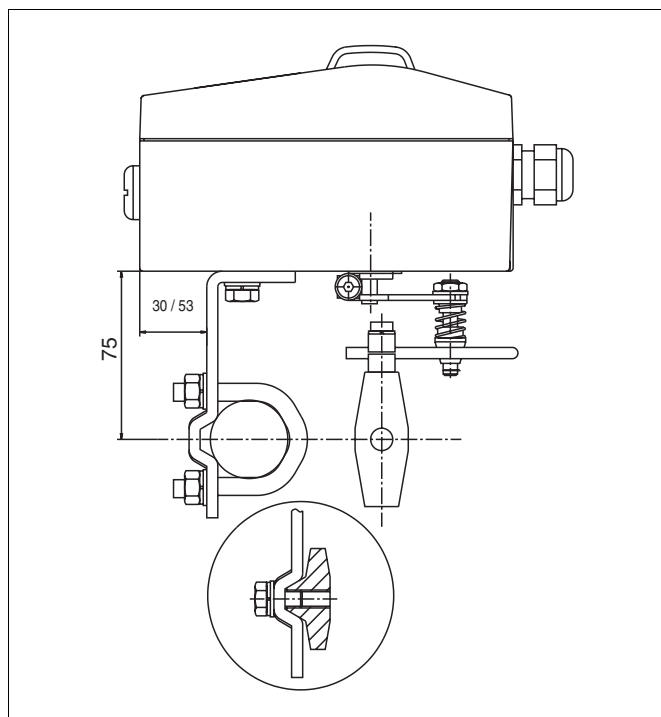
Mounting to linear actuators to DIN/IEC 534
